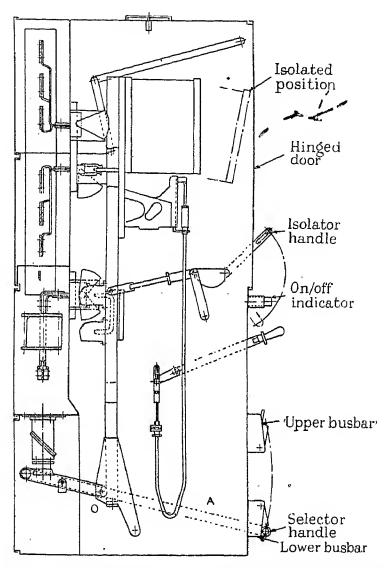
Sectional view of hand-operated double-busbar equipment plugged on to lower busbars (interlock not shown).
